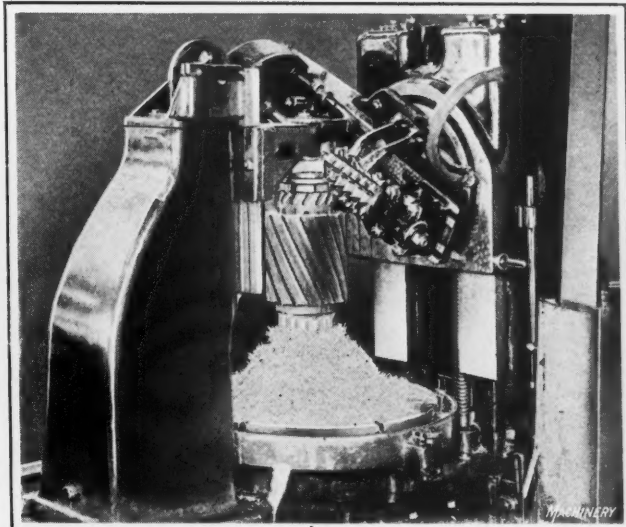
Cutting Helical Gears made of Chrome-nickel Steel
